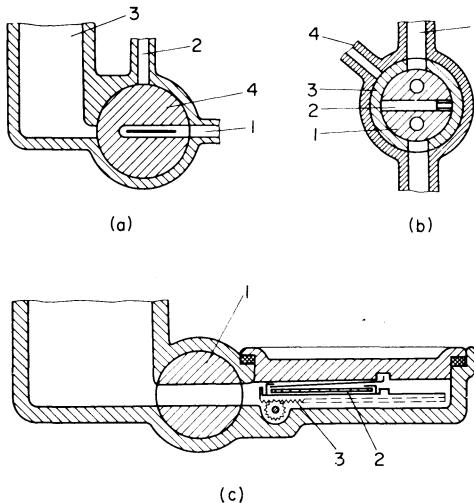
Vacuum locks, using plugs. Object travels radially. (a) Plug with pit; (b) plug with pit and double shell; (c) straight-through plug and evacuation chamber
